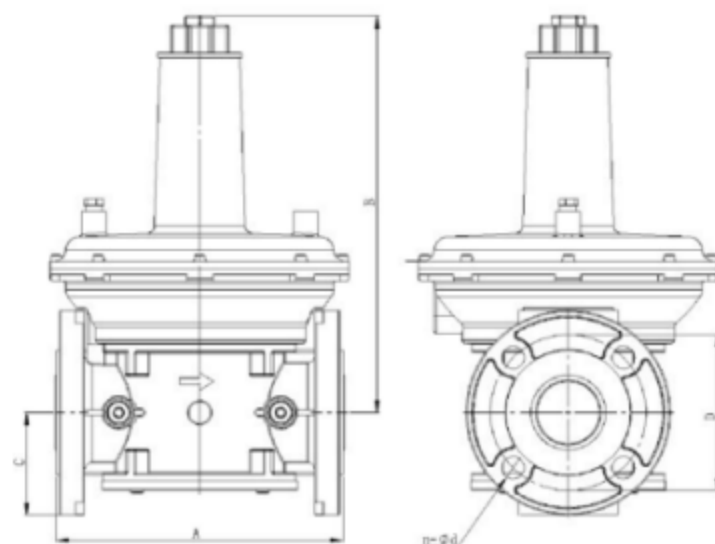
Outline dimension drawing of AGV pressure reducing valve
